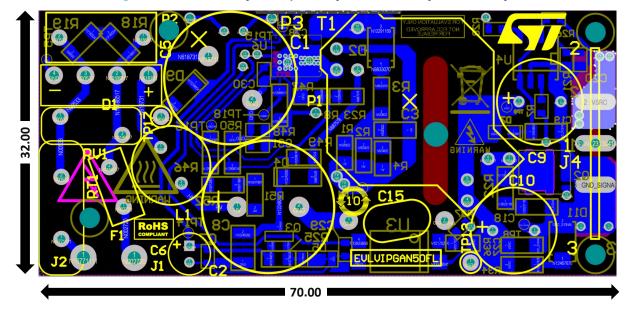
Mainboard layout: top overlay, bottom overlay & bottom layer
